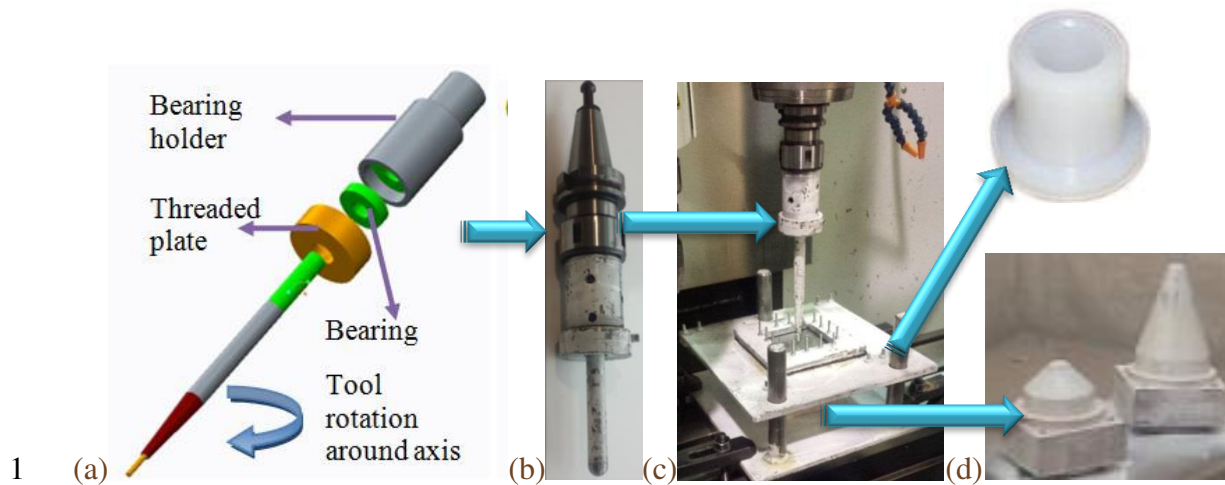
ISF equipment; (a) CAD model of rotating tool (4.5mm Dia), (b) Rotating tool (16.5mm Dia), (c) Equipment mounted on CNC, (d) Nylon bushes and wooden Dies.
